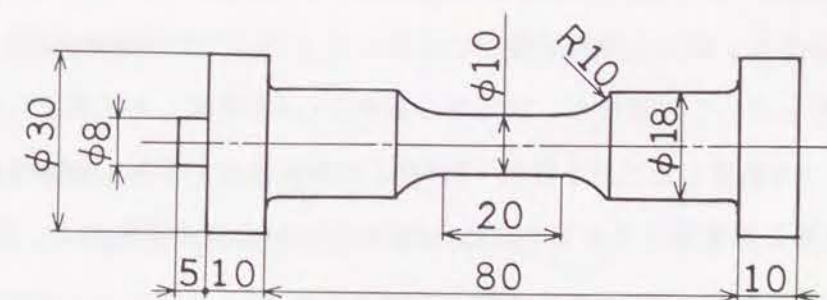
Shape and dimensions (in millimeters) of the specimen for the fatigue test.
